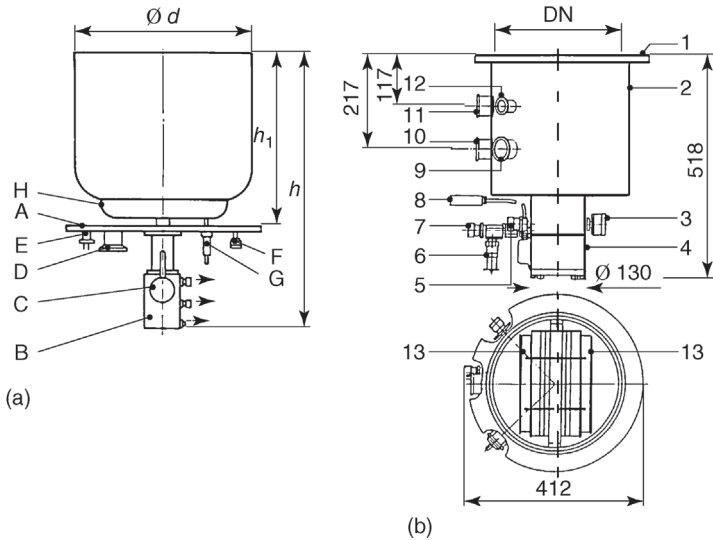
(a) Built-in type refrigerator cryopump: (A) connection flange for vacuum vessel; (B) refrigerator cold head; (C) thermometer; (D) fore-vacuum connection; (E) thermocouple; (F) boiler safety valve; (G) supply to ring tank (H) for LN₂; $h = 540\text{--}900$ mm, h_1 (radiation shield) = 240–530 mm, d (radiation shield) = 146–484 mm. (b) Built-on
